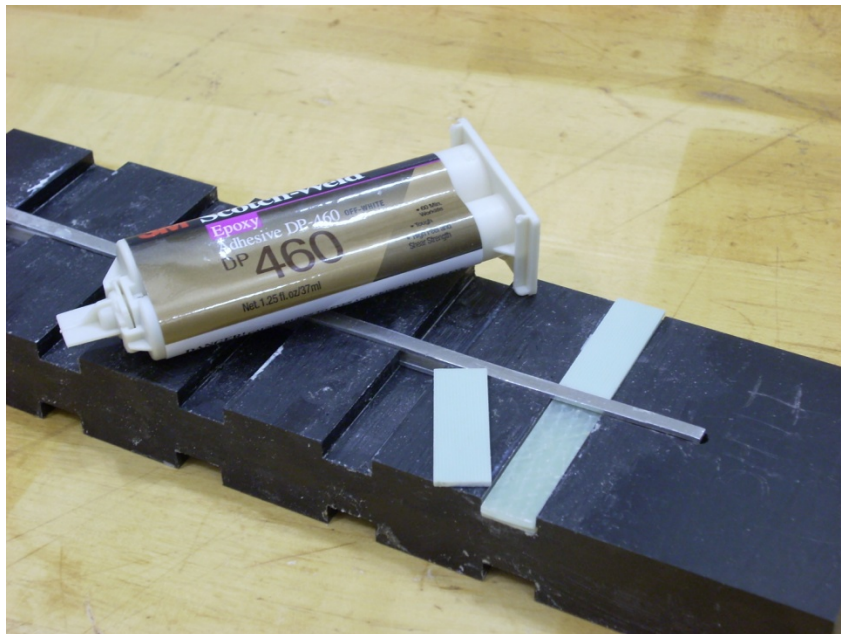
Specimen then Bonded on Top of Bottom Tabs and Top Tabs Being Inserted into the Fixture. The Secondary Aluminum Strip Acting as the Top Tab Displacer.
